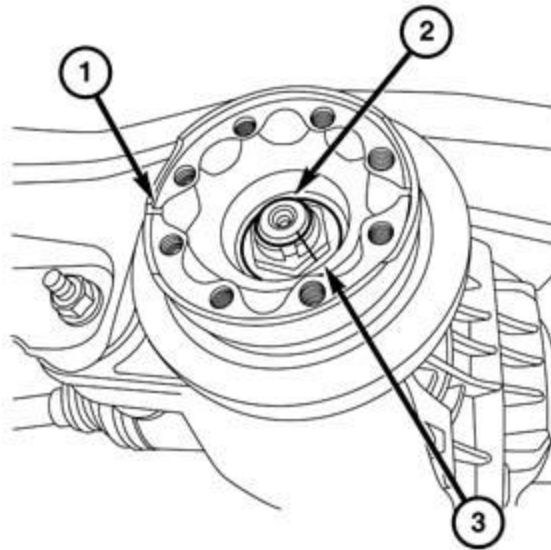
Pinion Flange, Pinion Shaft & Alignment Marks
